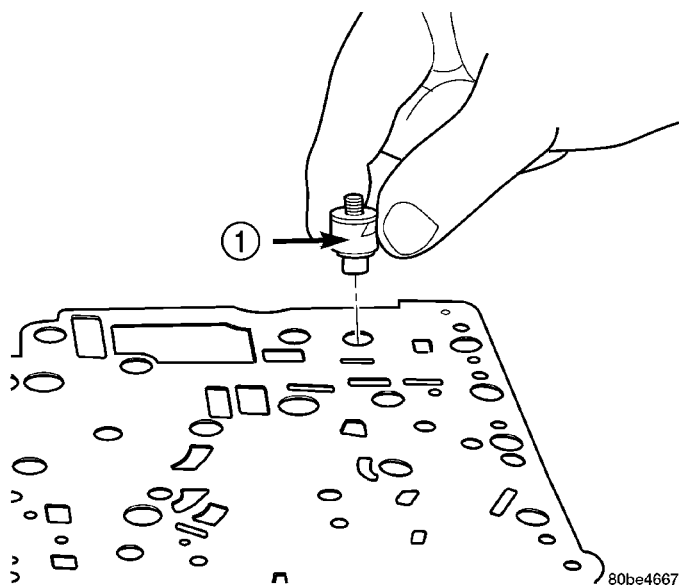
Remove Overdrive Clutch (#5) Check Valve
